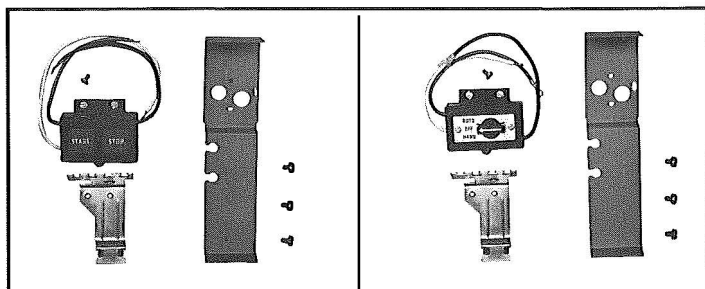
Component parts of push button kit (left) and selector switch kit (right).
